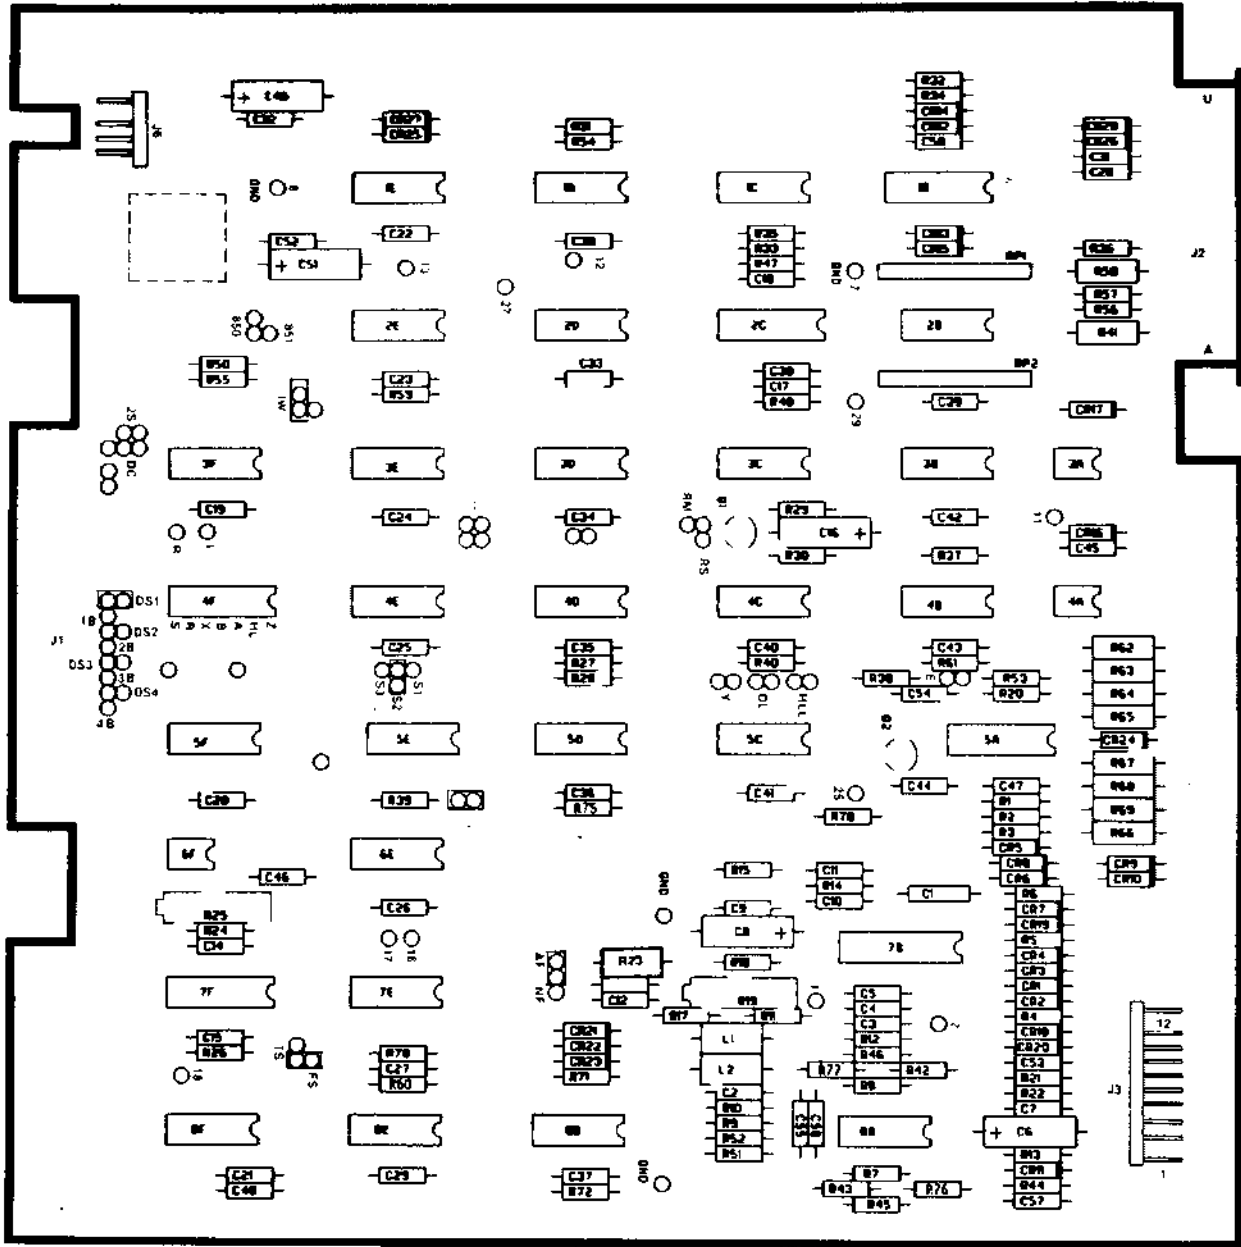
MLC 11 PCB COMPONENT LOCATIONS (P/N 25200)
